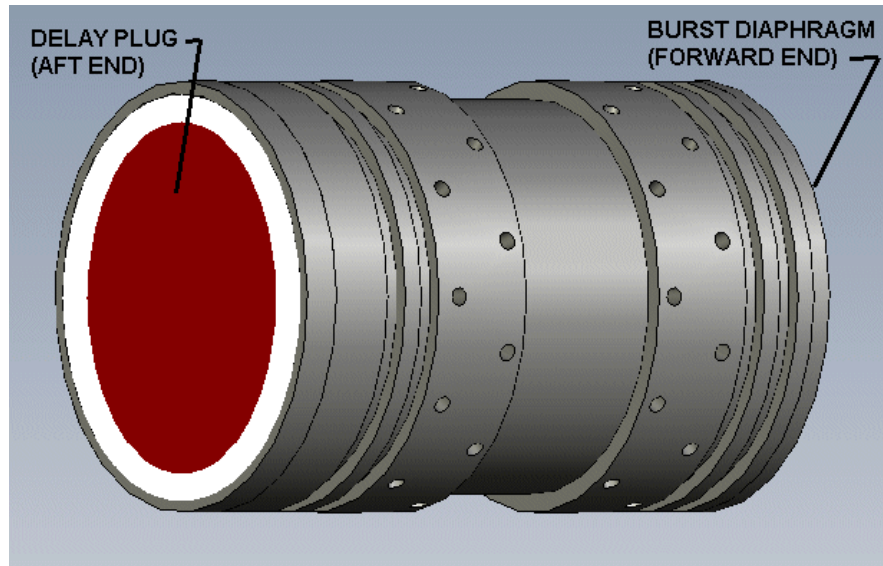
Mid-bulkhead assembly, indicating Delay Plug (aft end) and Burst Diaphragm
